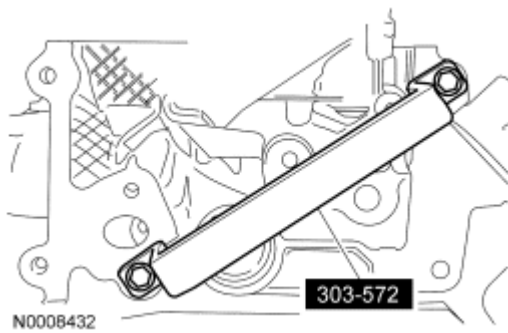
Identifying Special Tool (303-572) RH Cylinder Head
